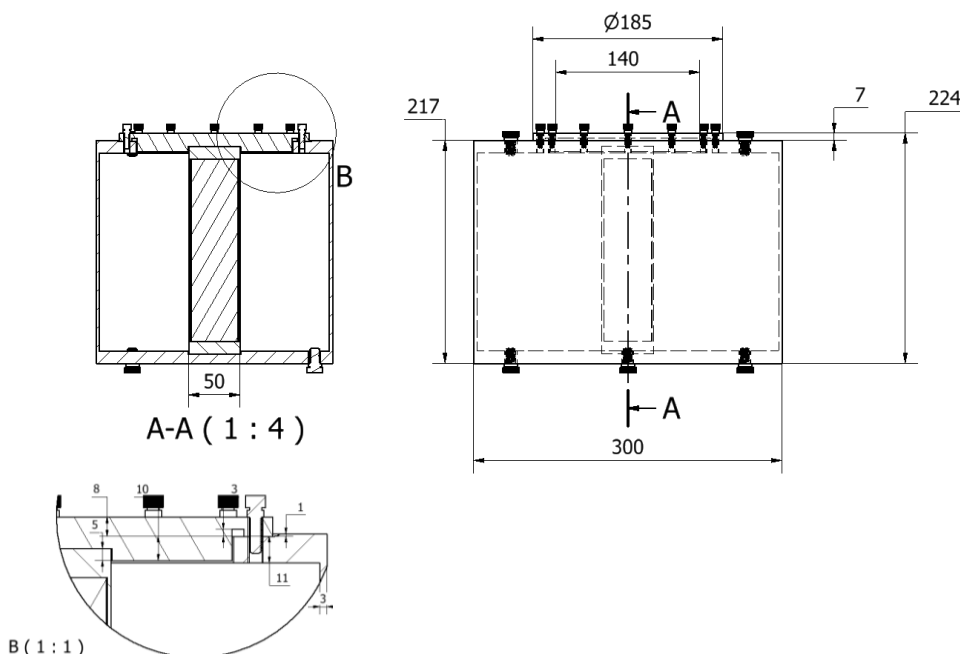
Frontal engineering drawing views of the NEMA Body PET phantom Normal frontal view of the NEMA box, cap and insert (right), sagittal section of the box and lung insert (left-up) (A-A), and detail view of the sagittal section of the bow and its closing cap and screws (left-down) (B).
